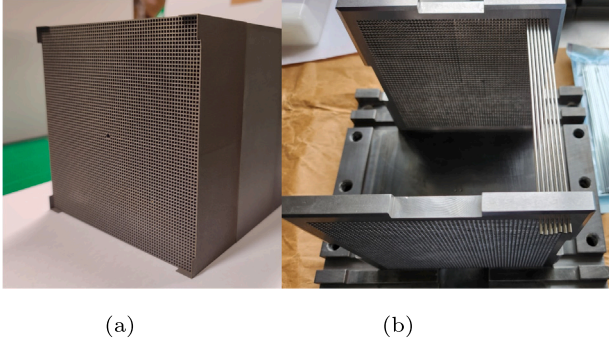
4(a) Four aligned 3D-printed tungsten absorber pieces. 4(b) A few out of several thousand stainless steel capillary tubes aligned with a pair of steel masks inside the mold before the casting.
